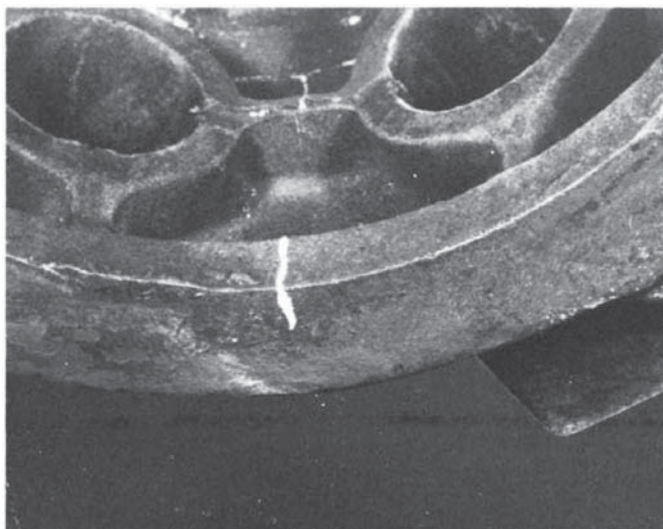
INDICATION OF SURFACE CRACKS (PRODUCED BY PROD MAGNETIZATION, AC CONTINUOUS)
